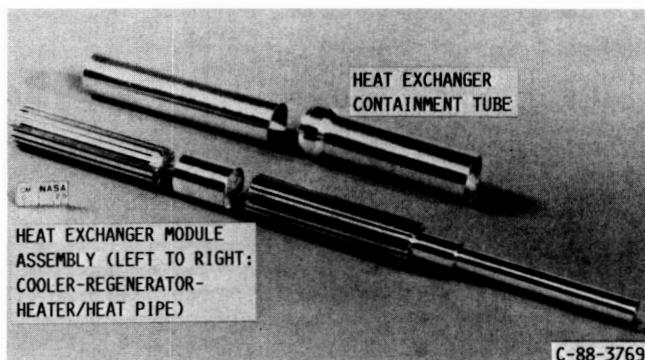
STIRLING MODULAR HEAT EXCHANGER ASSEMBLY.
